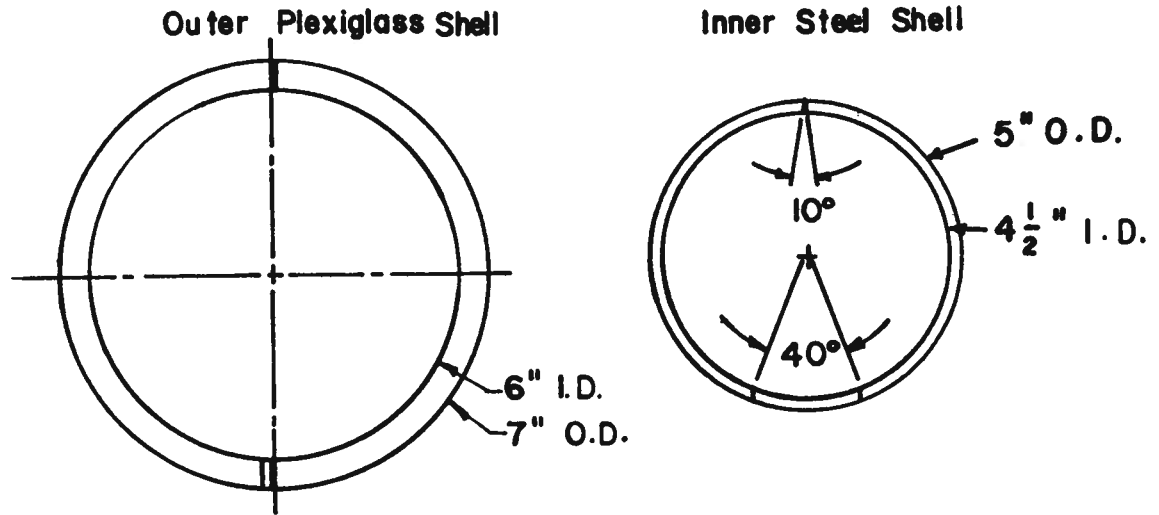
c DETAILS OF INNER AND OUTER SHELLS OF CASTING MOLD
